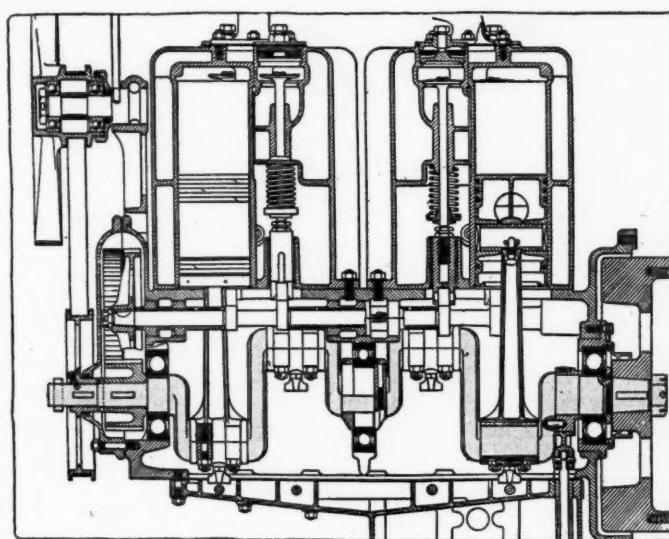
Sectional view through motor showing a ball-bearing crank-shaft installation
